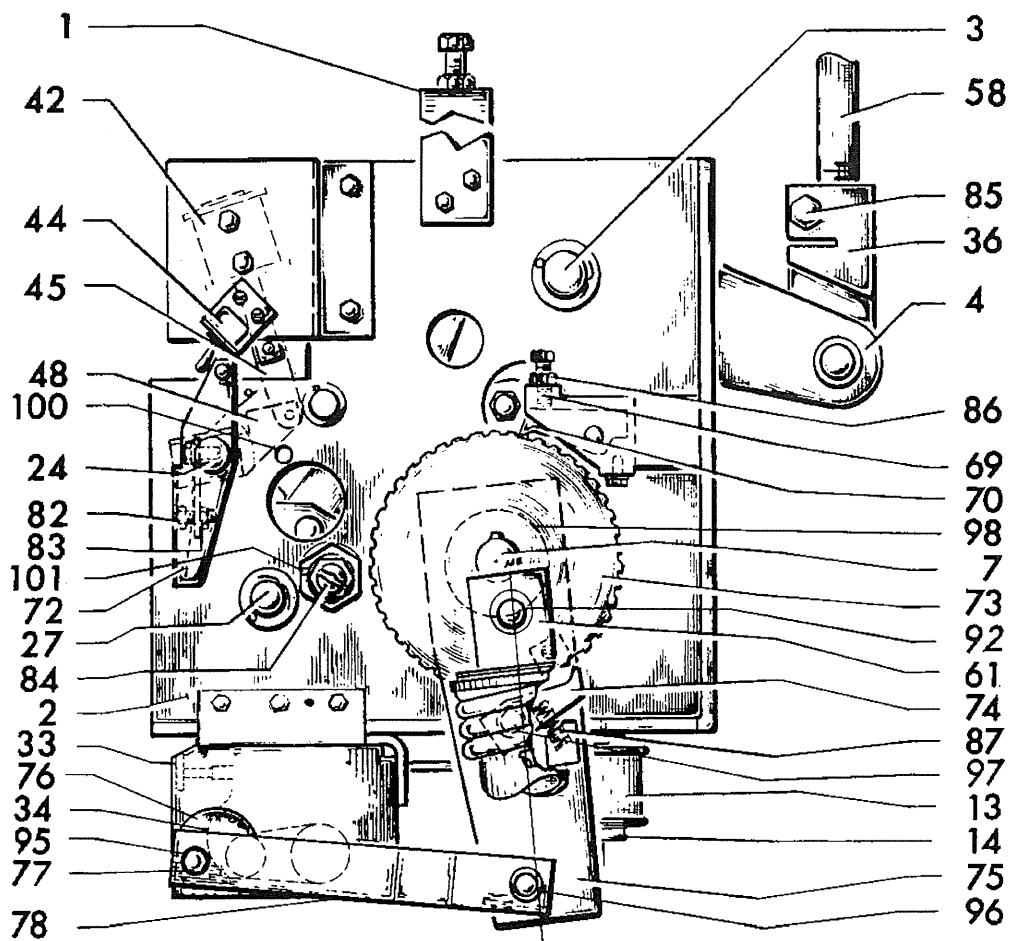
(0832D) 49 Sheet 1, View I (Rev. 5)
